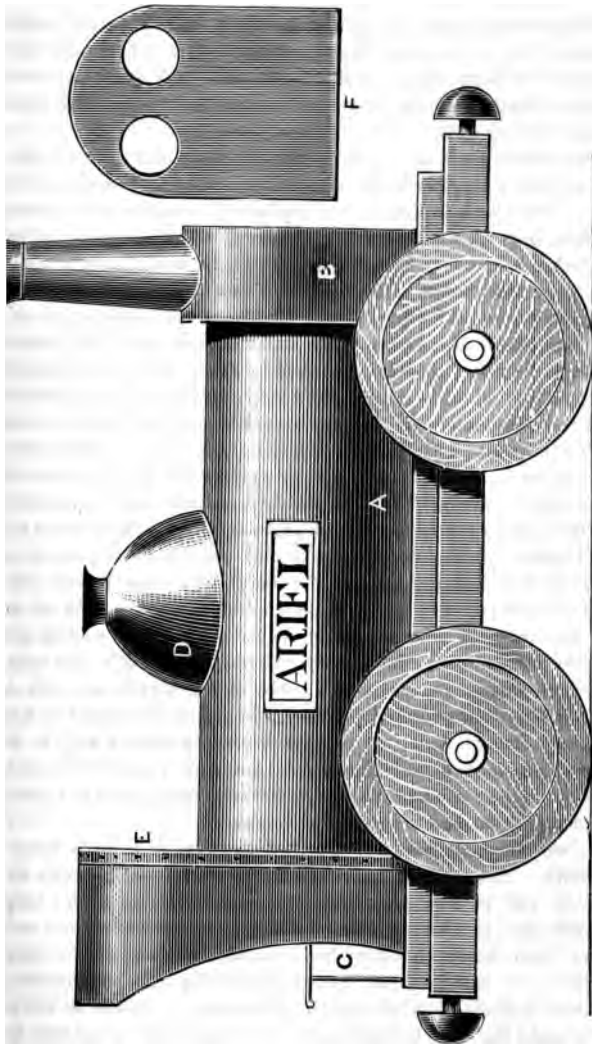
SIMPLE LOCOMOTIVE ENGINE.
